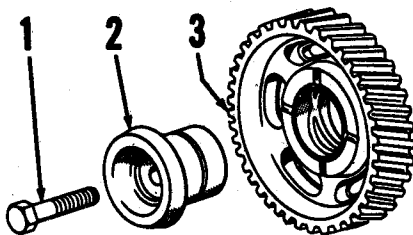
Camshaft drive (idler) gear and adapter as removed from front end of cylinder block. Bushing in gear is not available separately.
